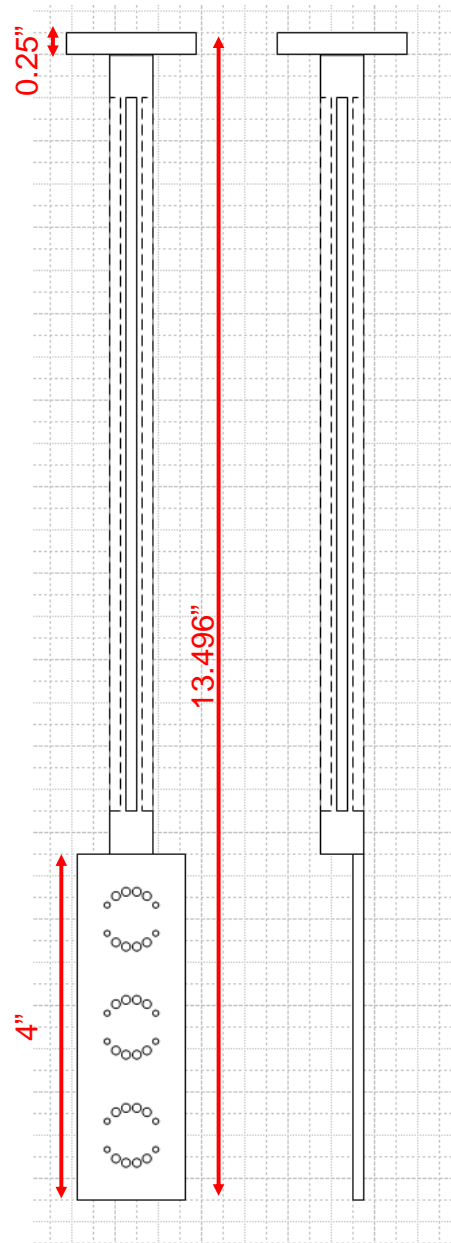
Schematic drawing of dipper tail; side view. The tail is designed so that the center of the 4-inch head is in the center of the magnetic field.
